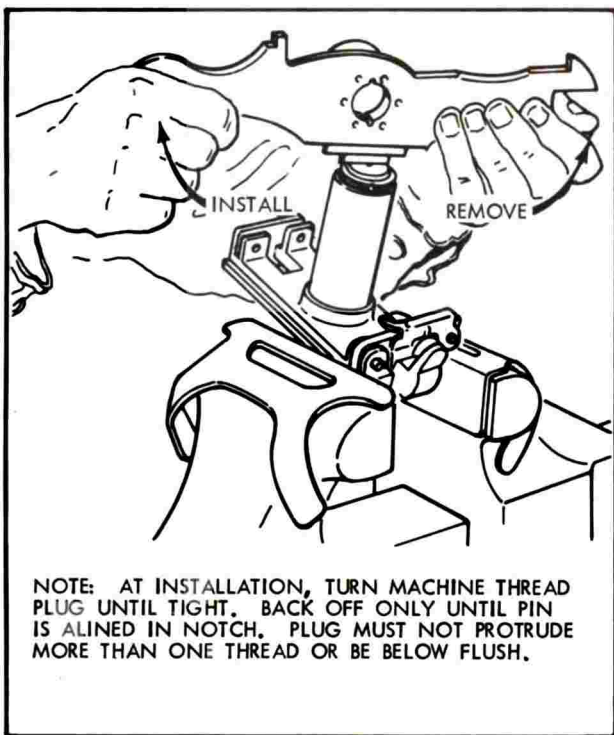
Disassembly/assembly of back plate group (M1, M13, Commander's Cupola). (3 of 3)
